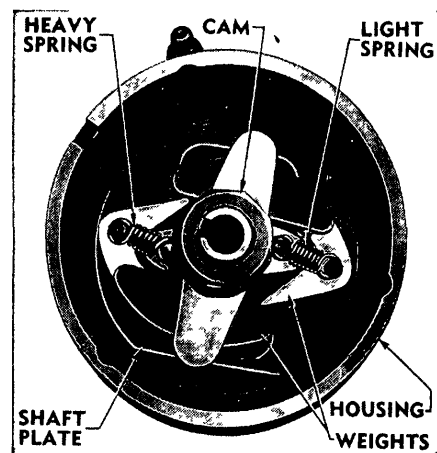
Top view of Delco-Remy distributor with breaker plate removed showing centrifugal governor mechanism
